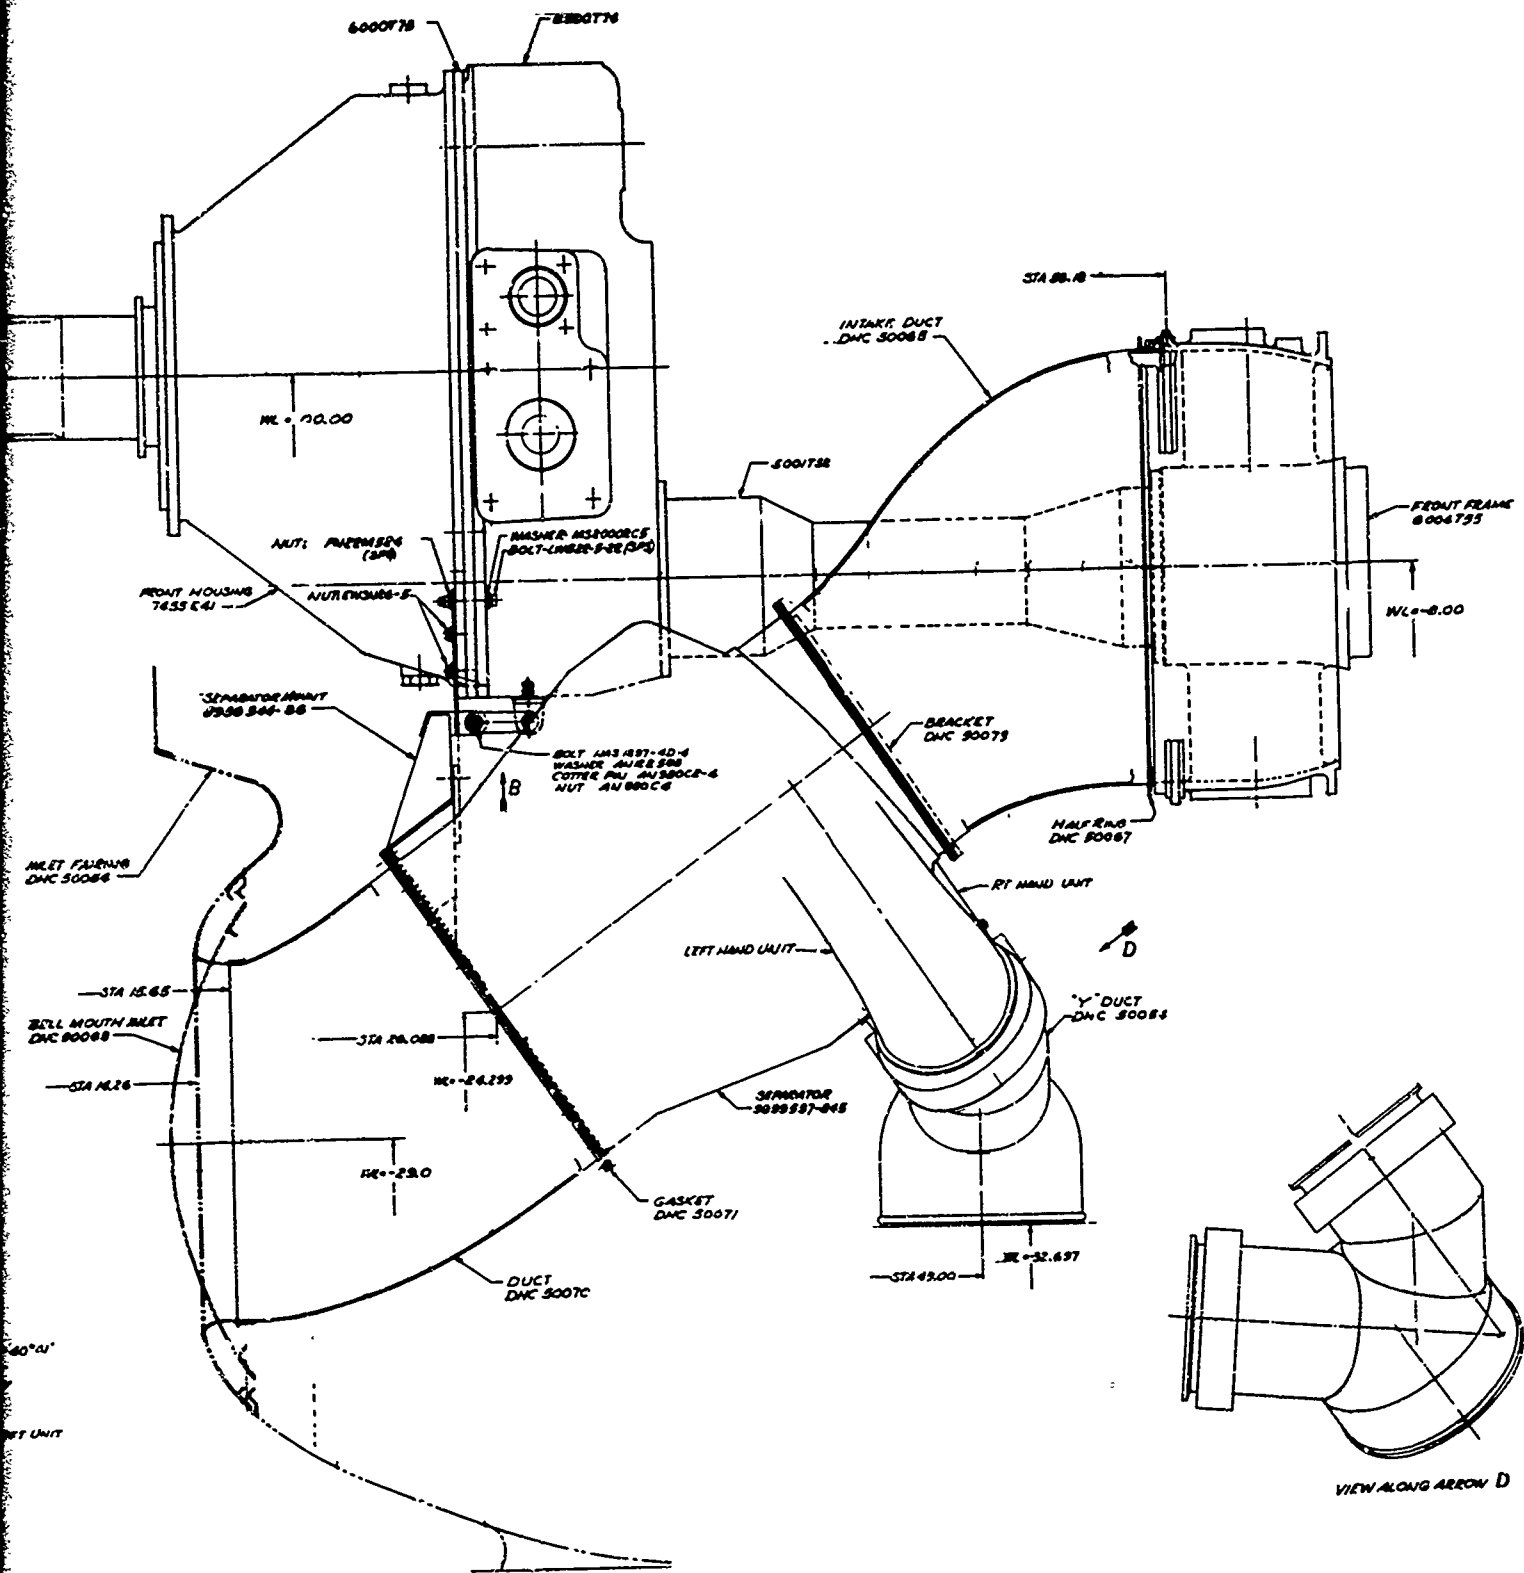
is a partial installation drawing of the separators, showing how the separators are mounted in the CV-7A nacelle. Six degrees of freedom are constrained by the mounting brackets attached from the separator inlet ends to the engine gearbox. A steady mount is provided by the rear section of the intake duct, which is attached to the front frame. This aft portion of the intake duct is bifurcated, changing from two circular areas at the separator discharge to one annular area at the engine front frame face. The portion of the intake duct forward of the separator has been changed from the one circular inlet of the standard CV-7A nacelle to two independent circular inlets as shown in Figure 6. Figuratively, the induction system with the separators is a pair of pants, with a separator in each leg and the waist attached to the engine front frame.
